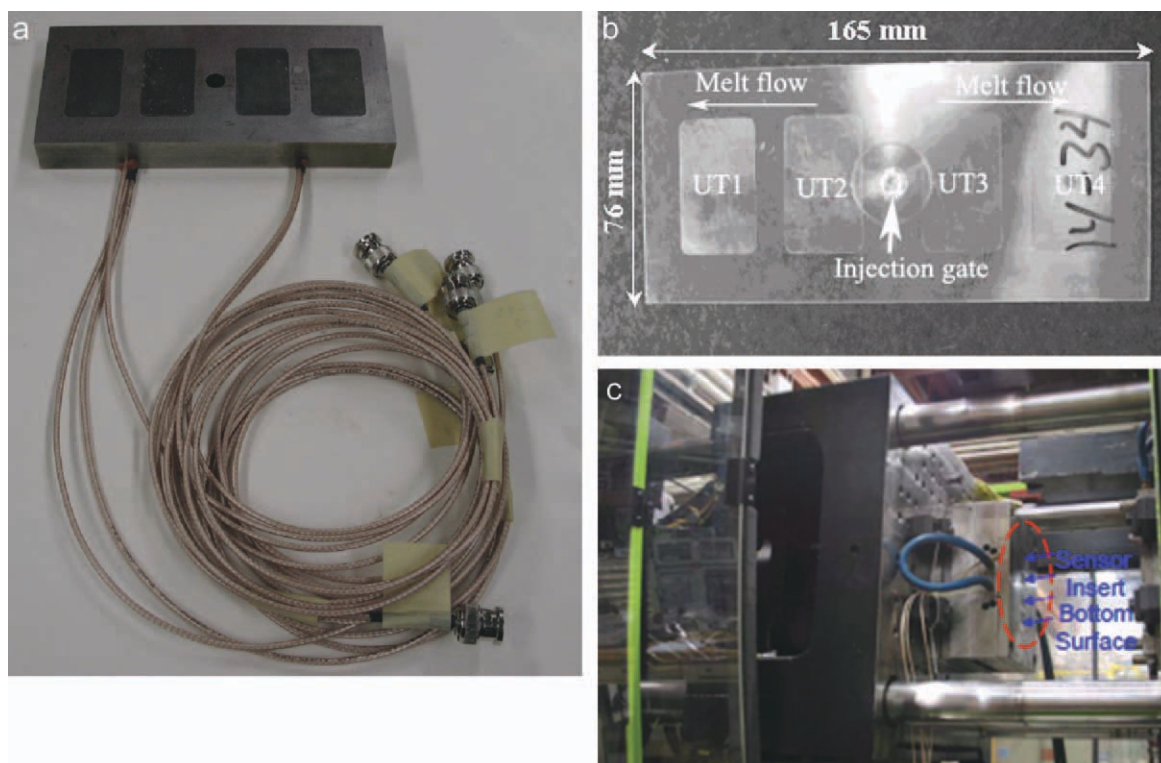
(a) HTUT sensor inserts with an electrical connection embedded in the mold insert used for monitoring injection molding process, (b) image of a molded sample part in IM, (c) mold insert integrated into an IM machine. [Color figure can be viewed in the online issue, which is available at wileyonlinelibrary.com.]
